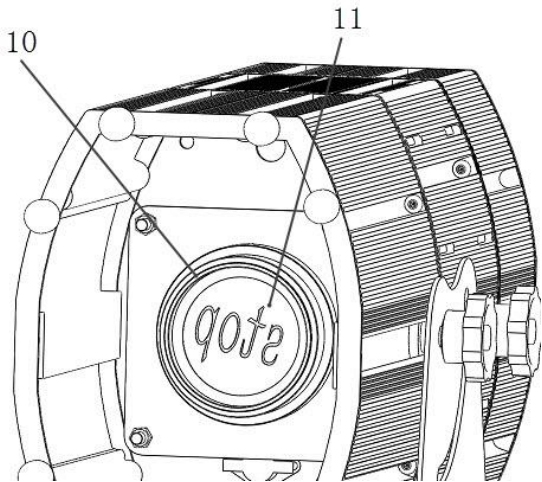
10- Logo Clamping Wire, 11- Glass Gobo
